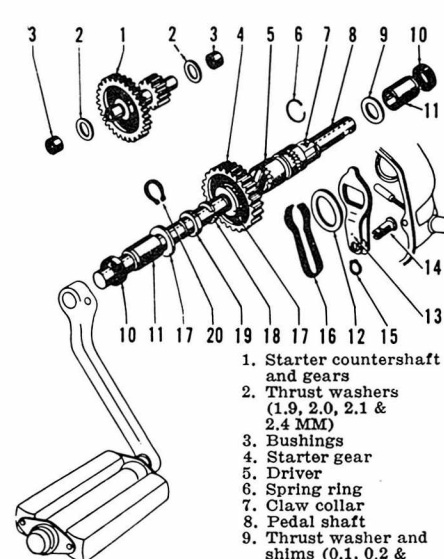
View of Mo-Ped starting and pedaling assembly.
